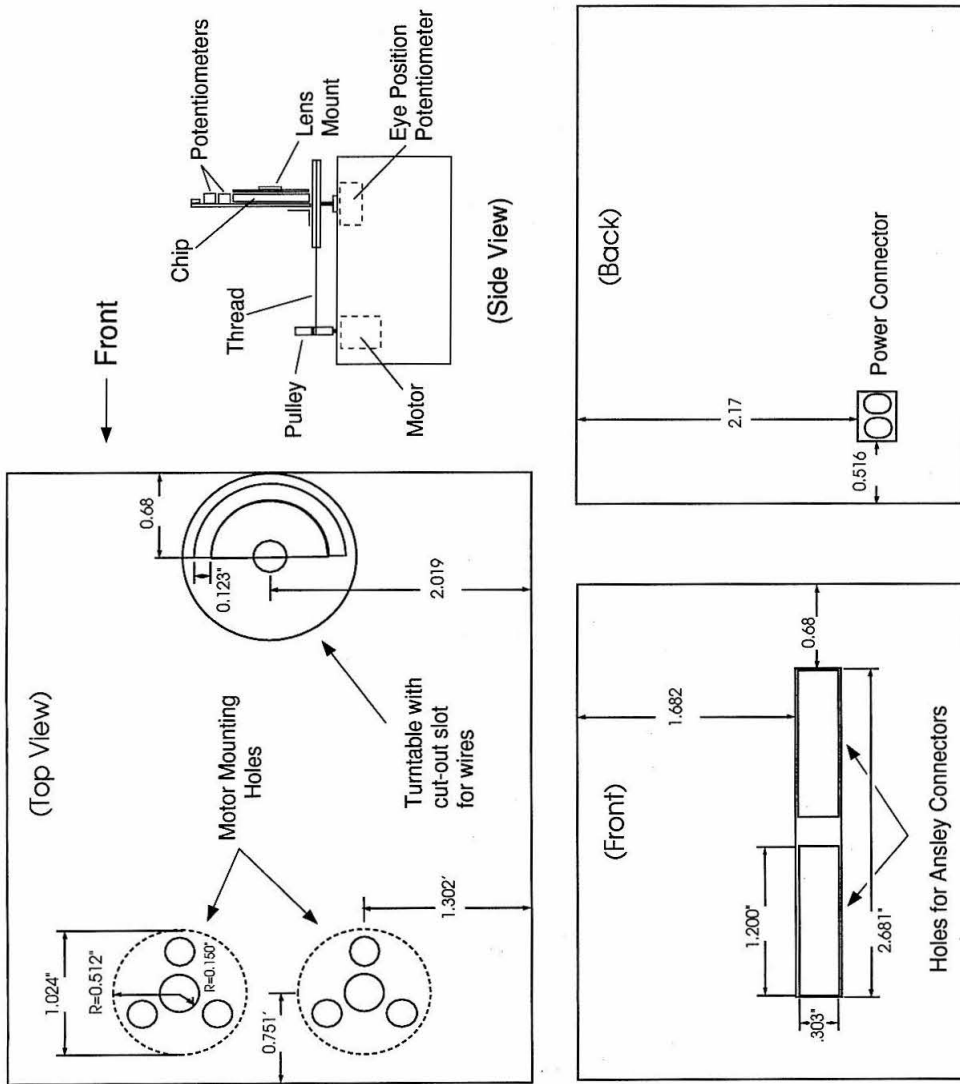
Mechanical drawing of the oculomotor plant box. Drawing by Brooks Bishofberger.
